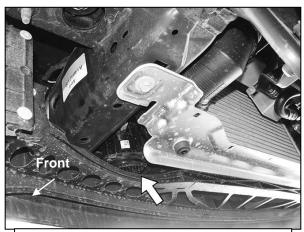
Remove bolts (arrows) to remove active air dam from motors (passenger/right side pictured)
